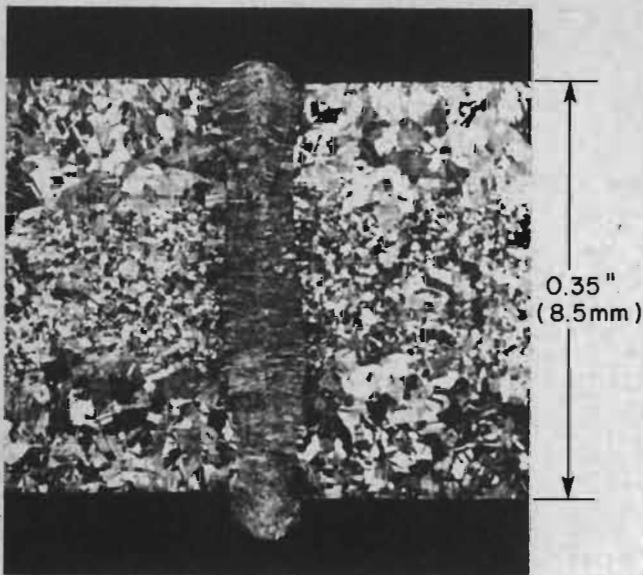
Butt weld between two sections 12" (30 cm) dia stainless steel pipe with 0.35" (0.9 cm) wall thickness. Weld was made in single pass from the inside by deflecting a laser beam, which entered pipe along pipe axis, to a radially outward direction.
